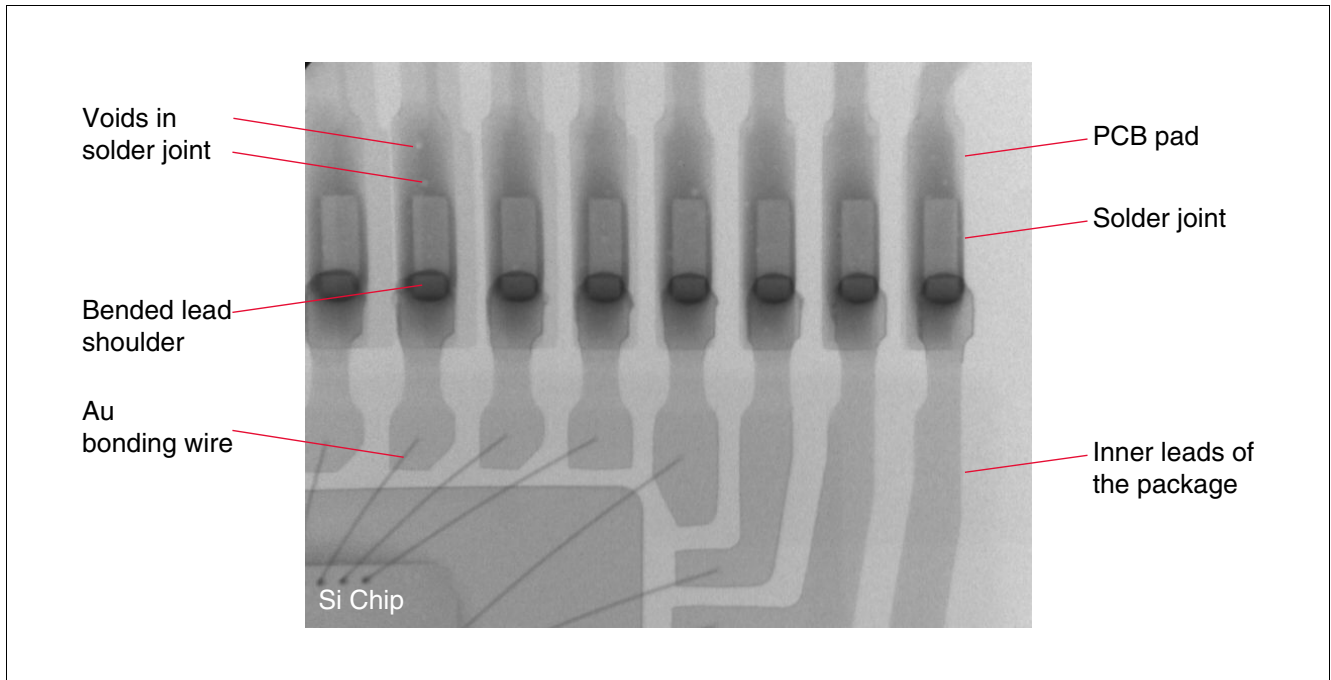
Typical X-ray image of a soldered PG-TSSOP-38-4. Visible are solder joints with some small voids, bonding wires, Si chip, board pads and leadframe parts.
